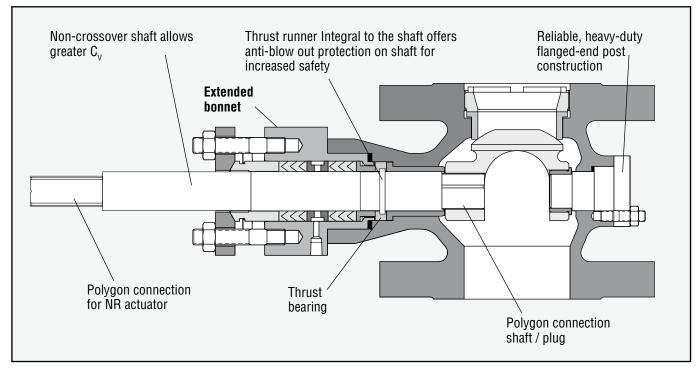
MaxFlo 3 Rotary Eccentric Plug Control Valve, Body Subassembly
